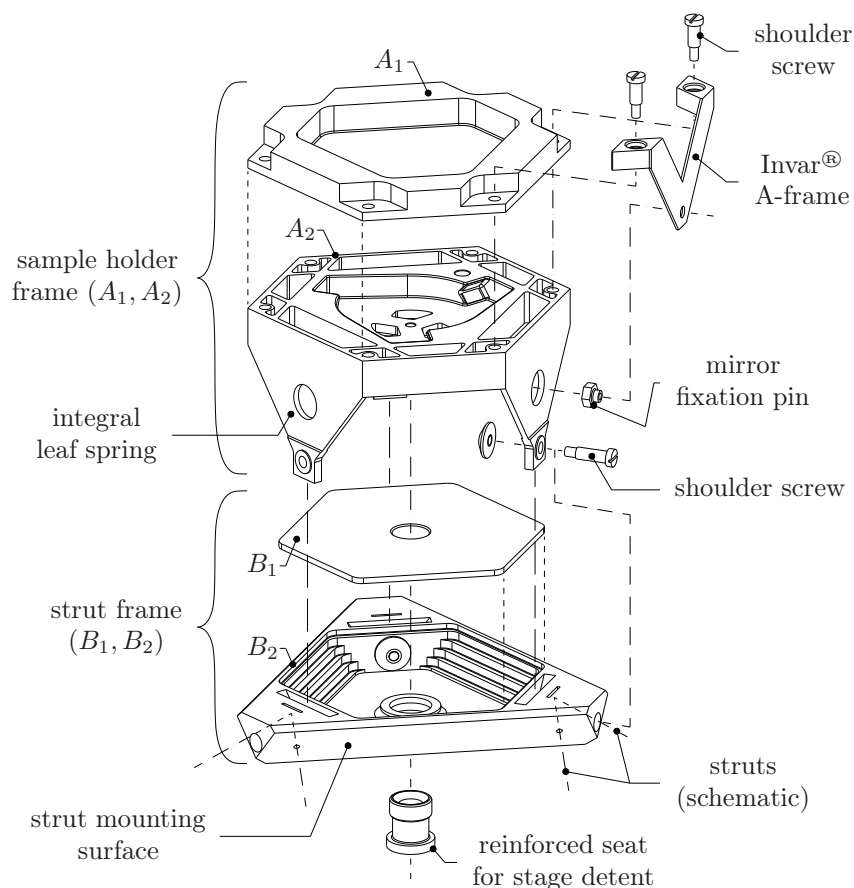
/ Exploded view of the sample table frame. The sample table frame is assembled from the sample holder frame and the strut frame. The moving target mirror and the sample holder are not shown.
